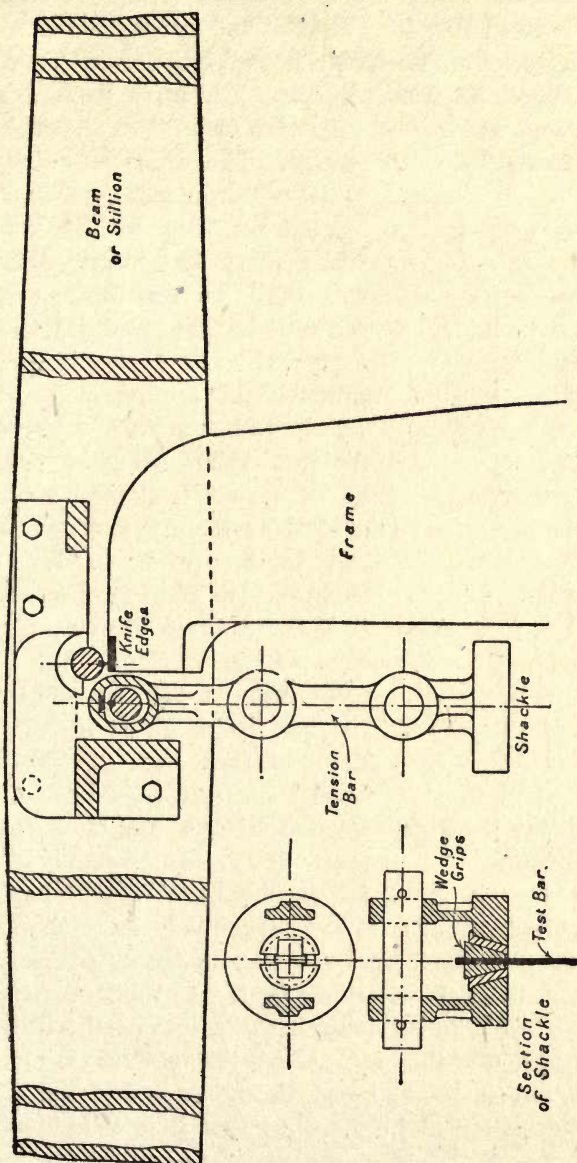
Details of Knife-Edges, Shackle, and Grip.
